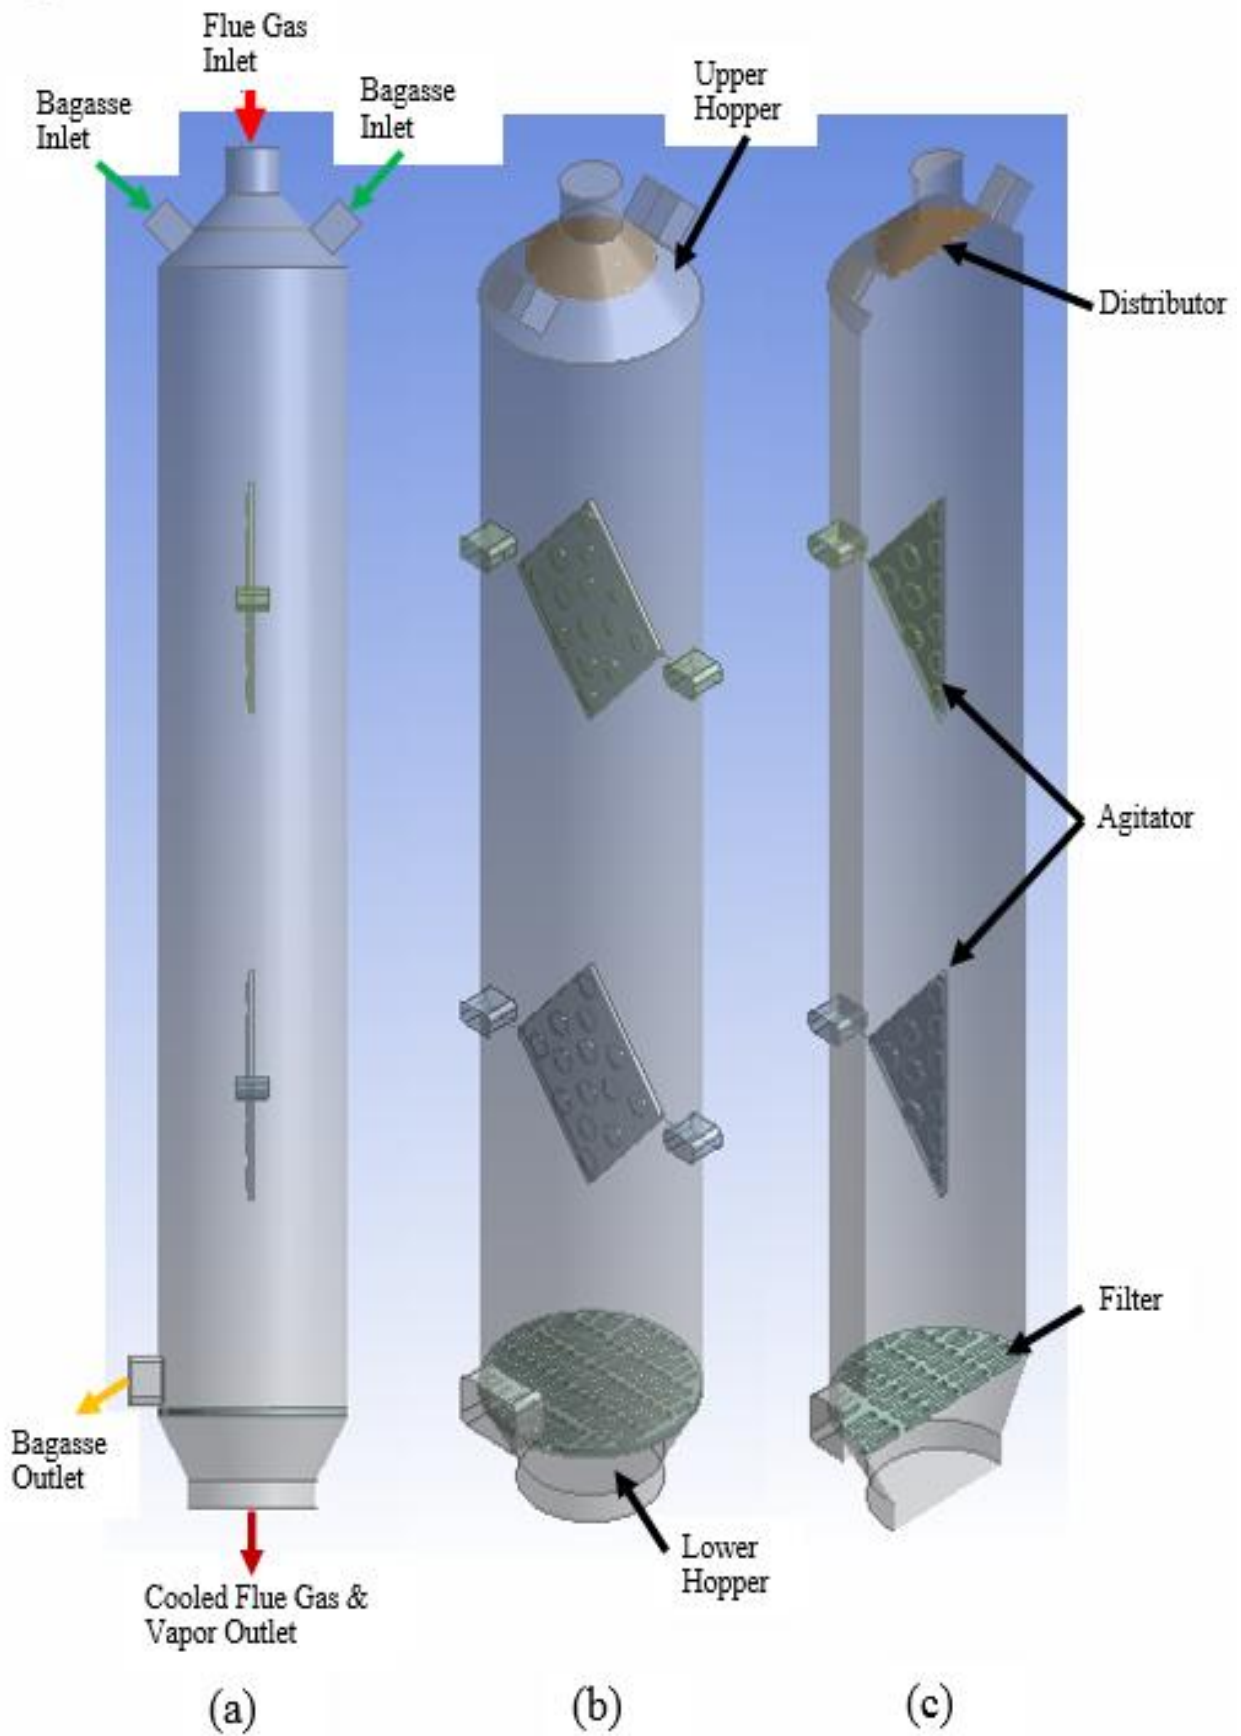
Assembled FBD (a) Front View (b) Isometric View (c) Sectional View
